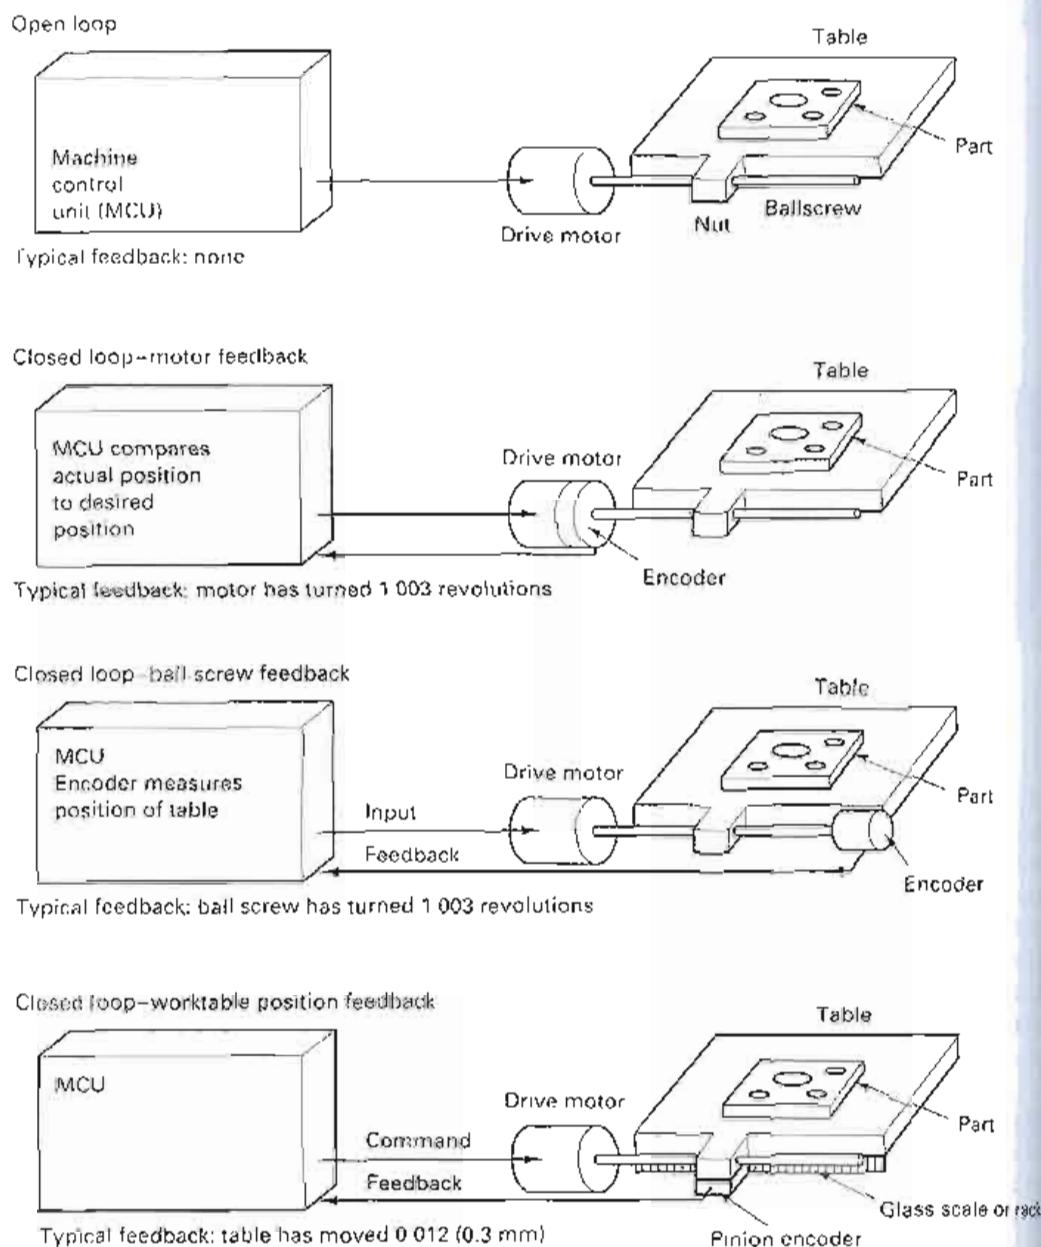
Open-loop NC versus three position control schemes for NC and CNC machine tools.
